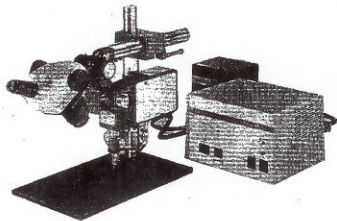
Model 50F Light Force Weld Head with optional Microscope and Unibond II(R) Constant Voltage Power Supply.
